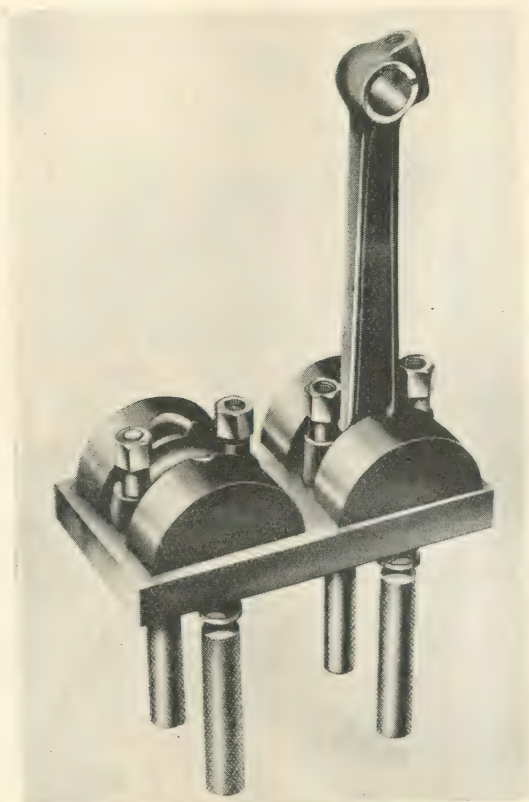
MOULD FOR TOP AND BOTTOM BIG-END BEARINGS
